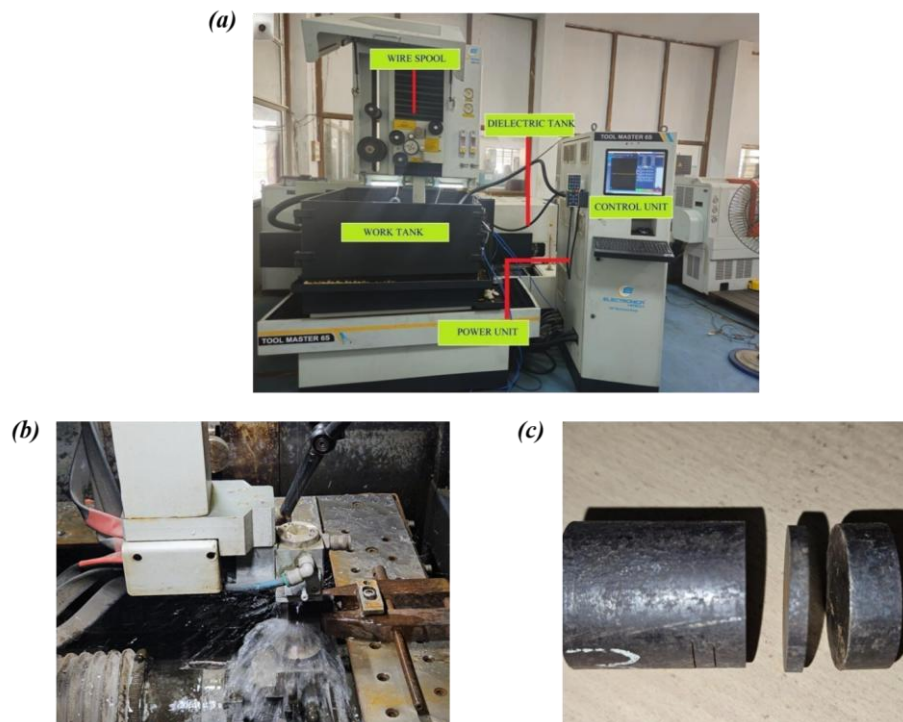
(a) Wire EDM machine setup used in this study (b) parting operation on EN31 workpiece (c) EN31 workpiece after parting operation
